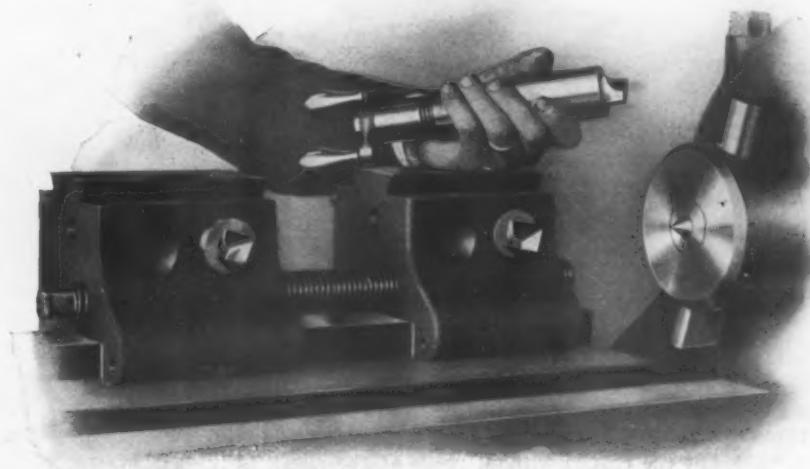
Detail Showing a Tool Holder and Adjusting Screw Removed Intact.
